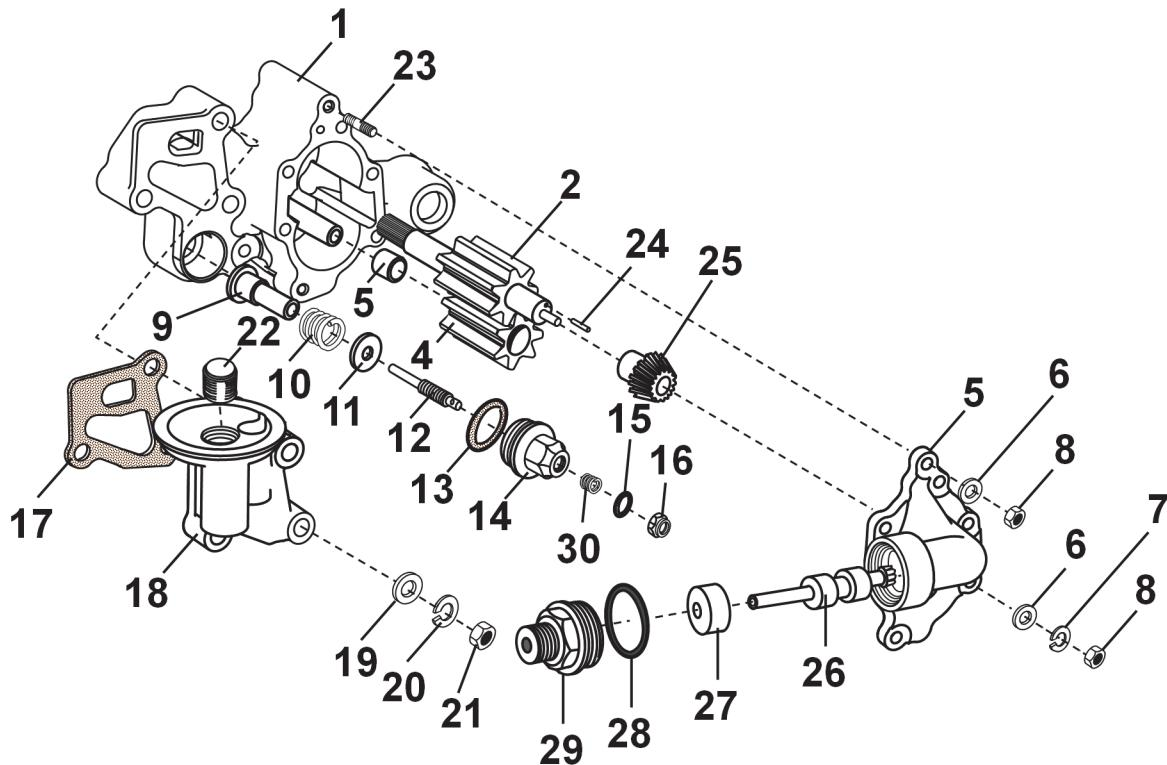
Oil Pump with Mechanical Tach Drive Assembly
